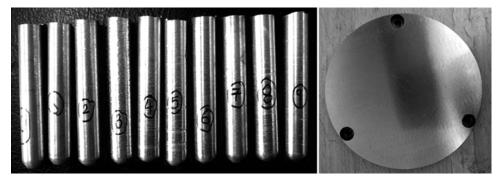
Standard wear specimens as per ASTM G99-17 and EN 31 disk
